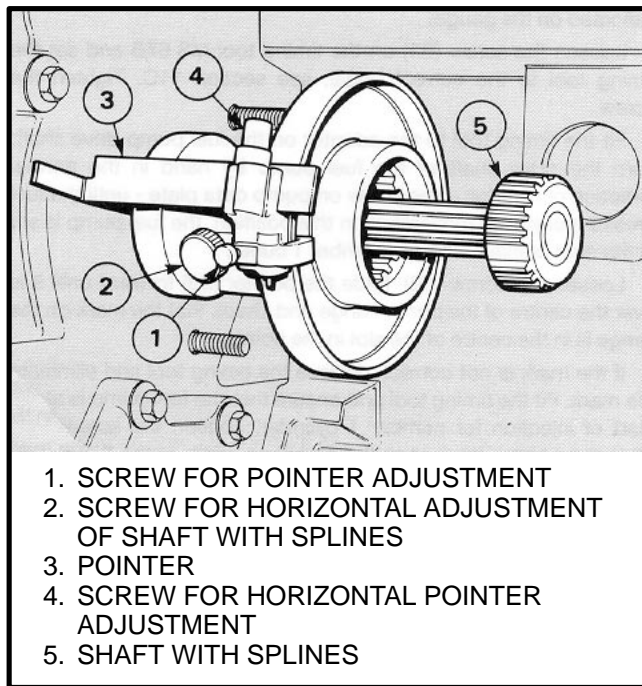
INSTALLATION OF THE UNIVERSAL TIMING TOOL
